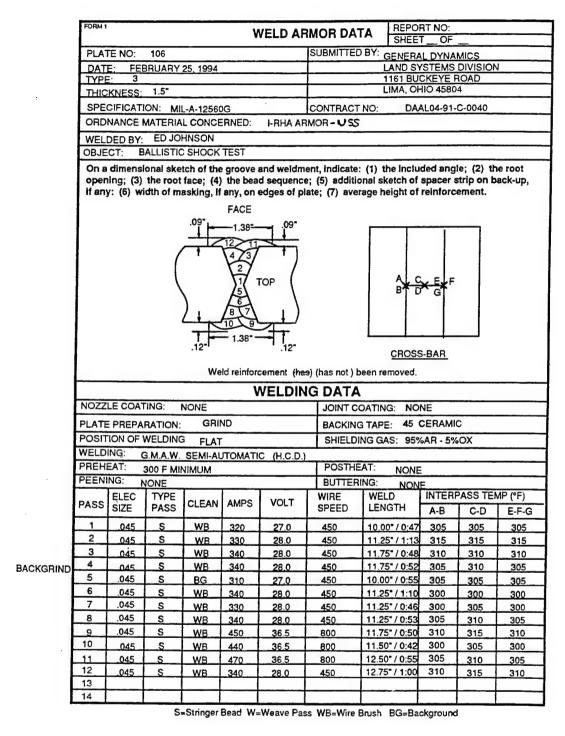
Welding Data Sheet for H-Plate Weldment (USS IRHA).
